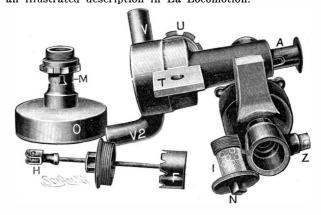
PRINCIPAL PARTS OF THE CARBURETER.
